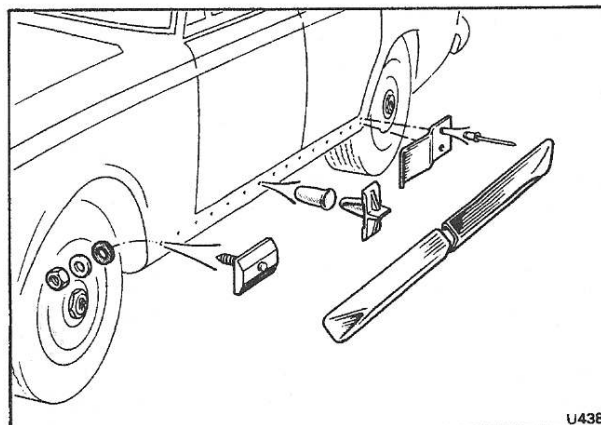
Body sill moulding strips (Silver Shadow II, Bentley T2 and Silver Wraith II)
